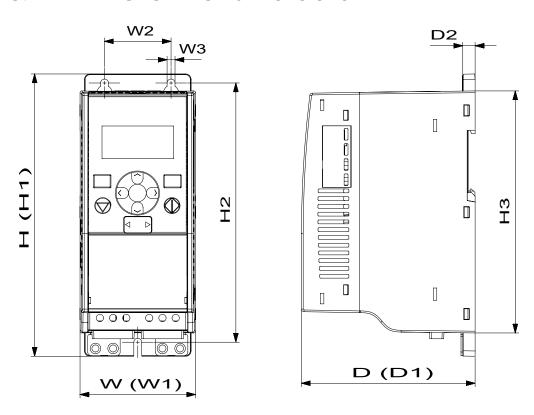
HVAC232/402 dimensions, MI1 - MI3
